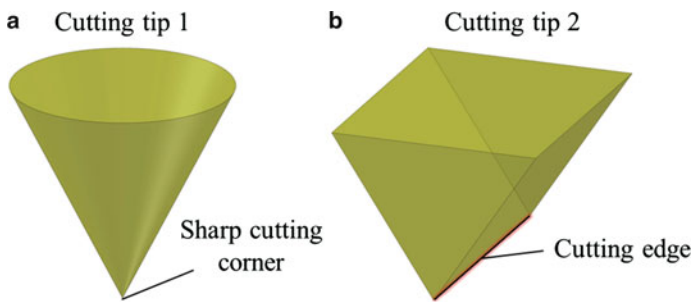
Two types of cutting tip: (a) a conical shape and (b) triangular prism shape
